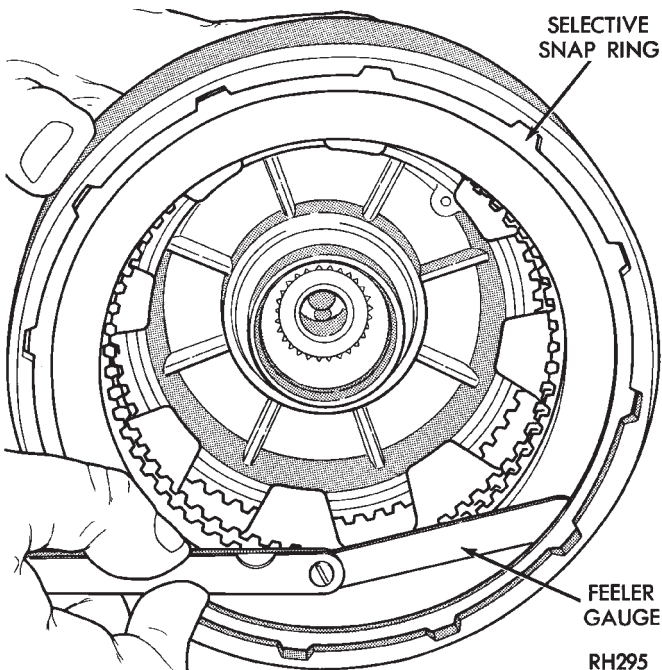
Typical Method Of Checking Rear Clutch Pack Clearance
